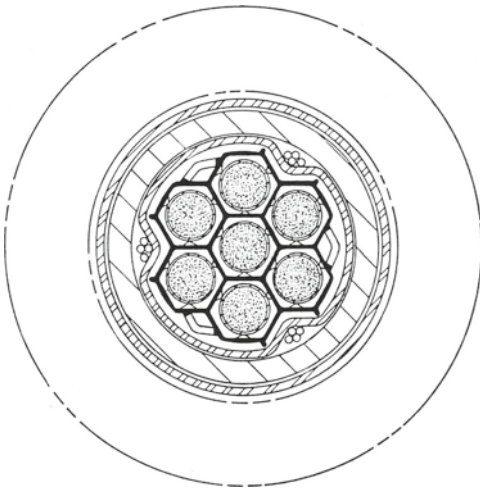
Cross Section of the 7-Pin Fuel Assemblies Used for Tests L05 and L06.
